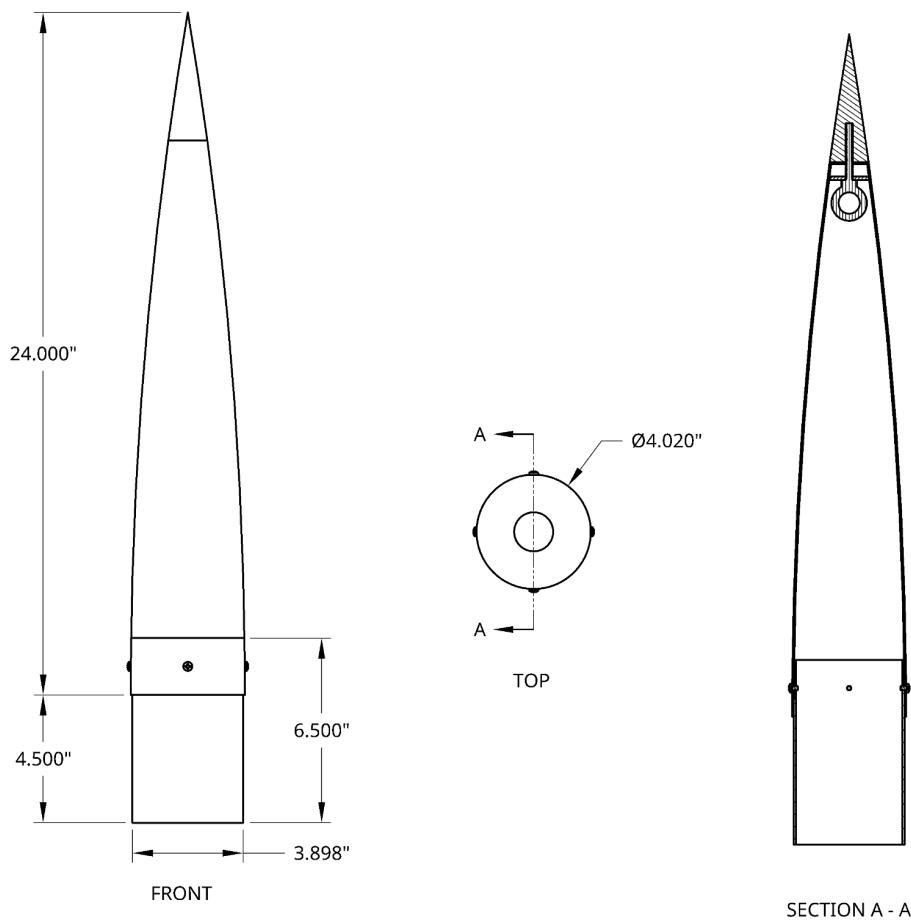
Nose Cone Section Dimensioned CAD Drawing
